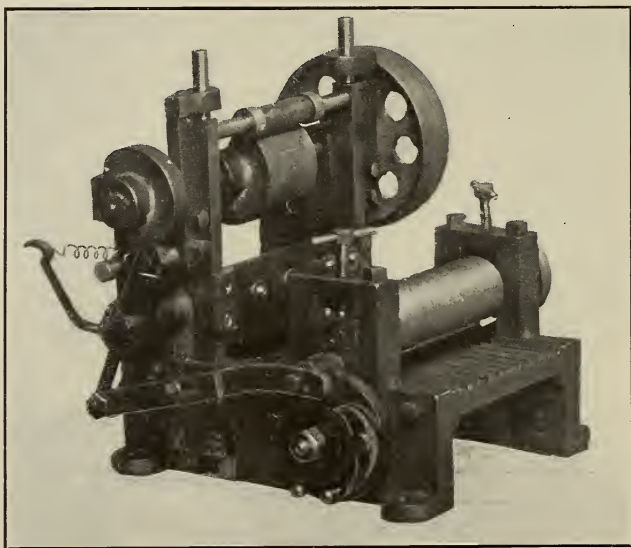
THE EXCELSIOR STOCK CUTTER.
